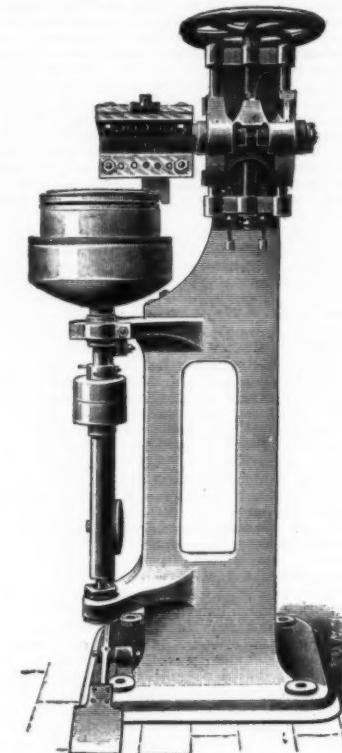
MACHINE FOR MAKING PLASTER MOULDS.
